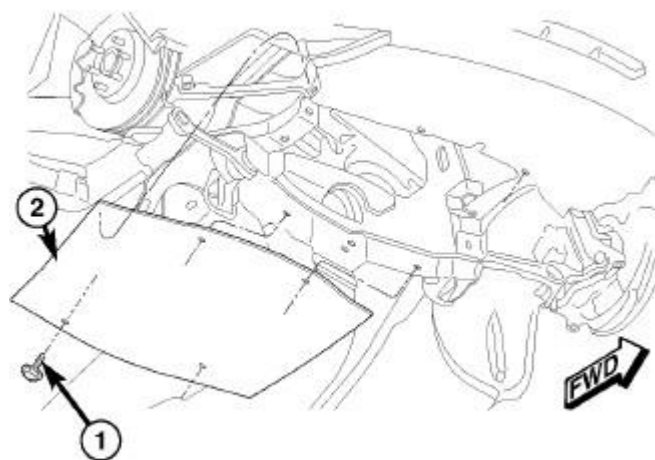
LEFT ENGINE MOUNT HEAT SHIELD RETAINING BOLTS
